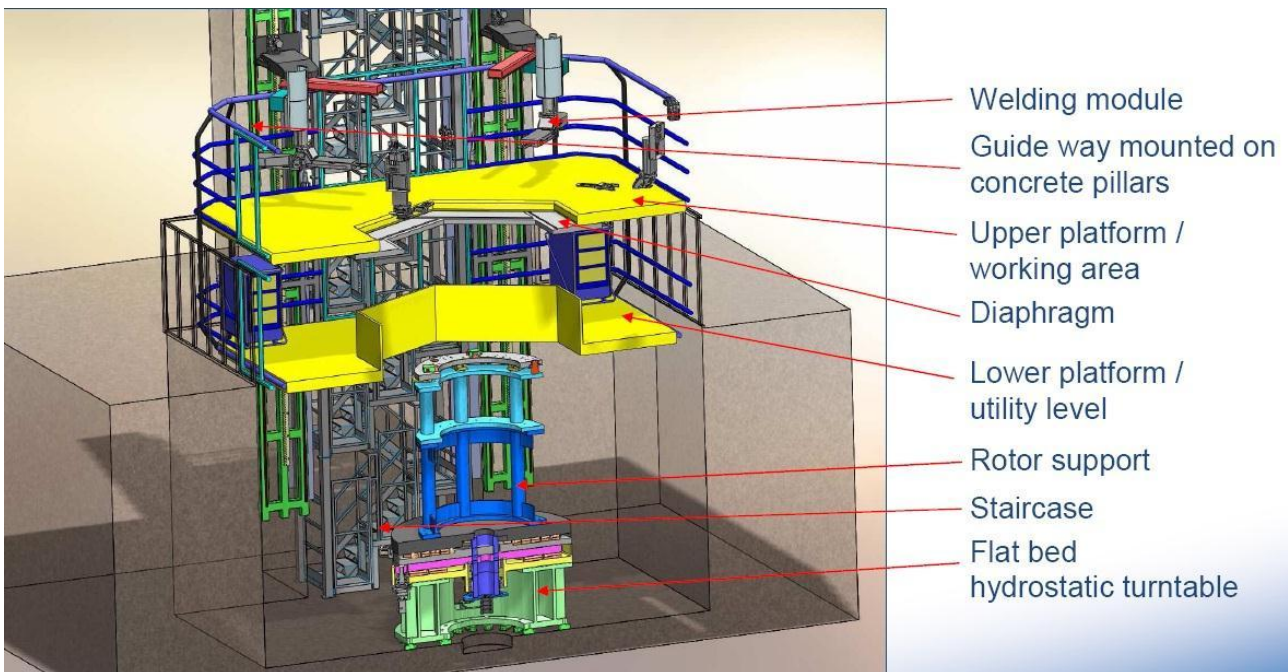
Cross section of a vertical welding stand [Polysoude 2010, p.67]
